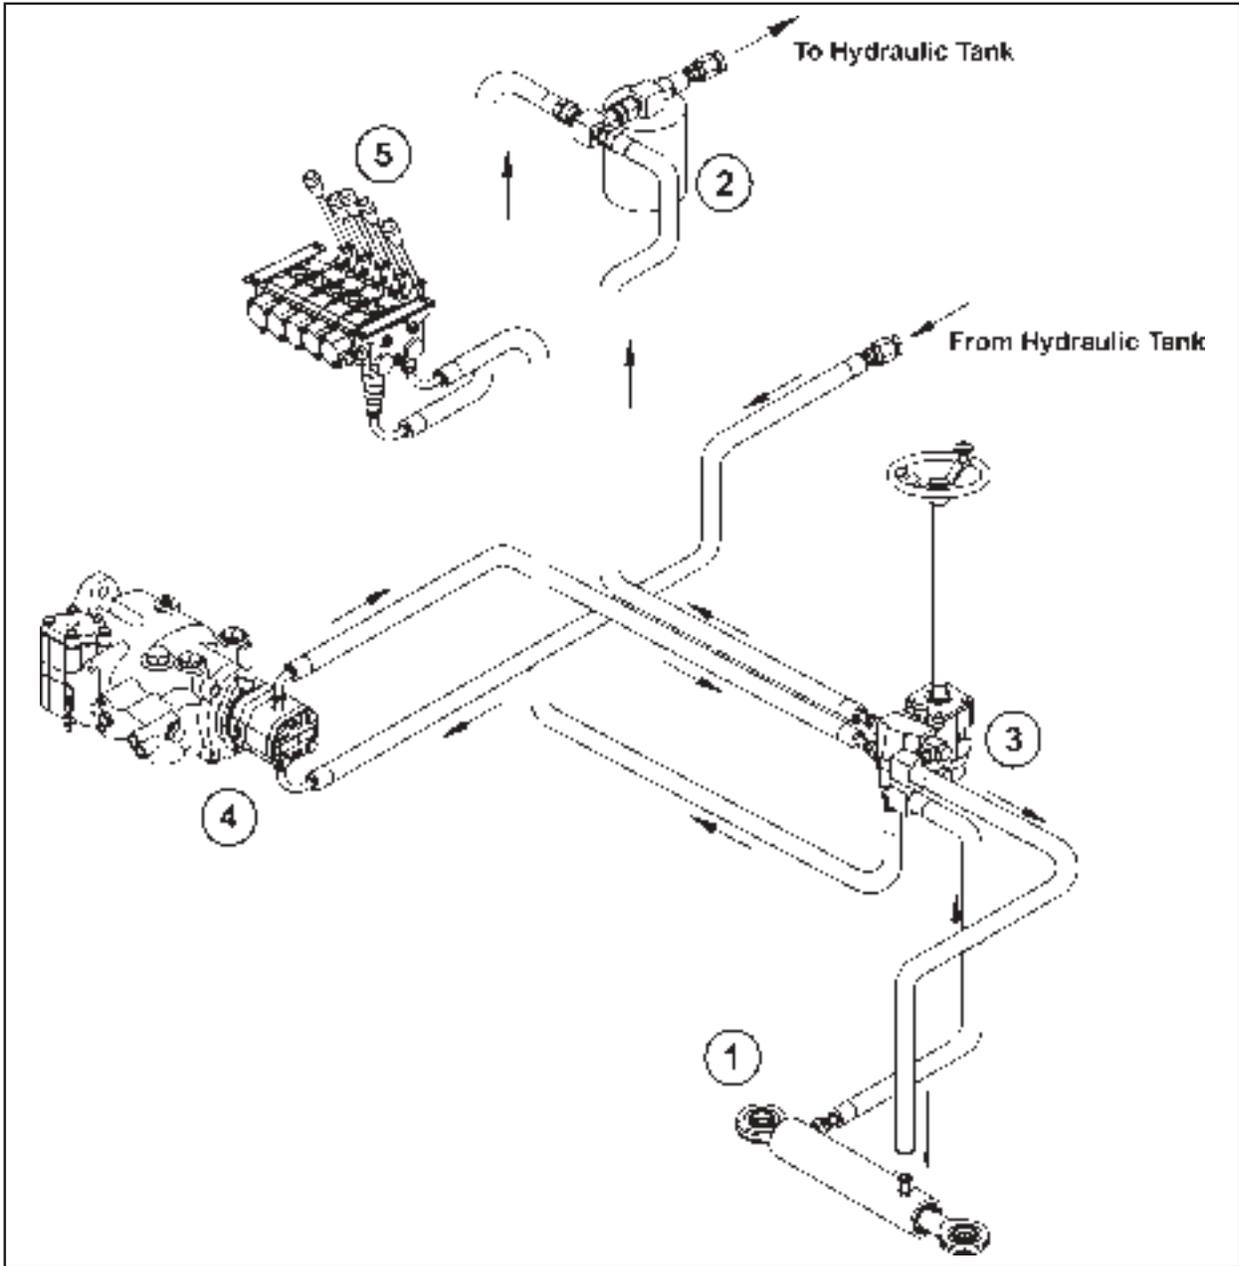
HYDRAULIC SYSTEM COMPONENT LAYOUT
